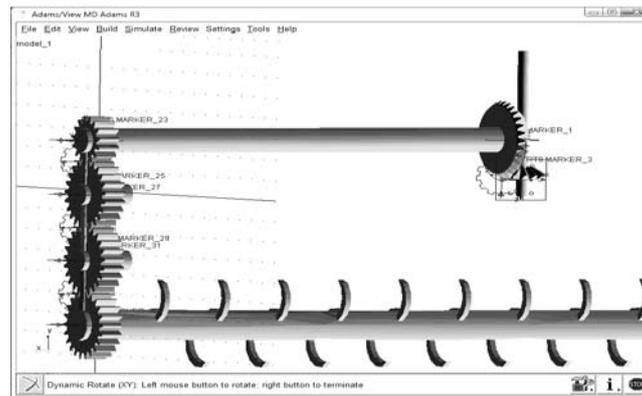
Virtual Prototype for the Drivetrain of Reversal Stubble-breaking Rototiller with All Constraints
